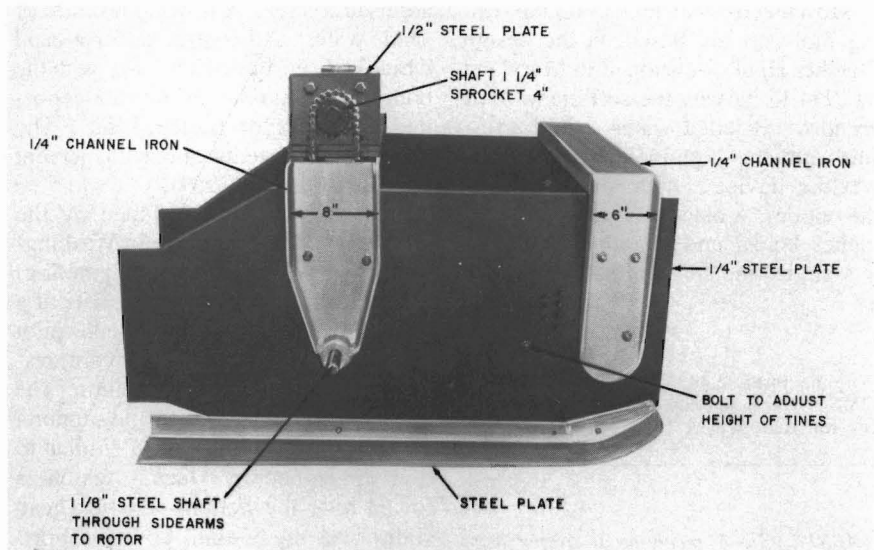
Side view of escalator during construction showing method of attachment of hydraulic drive motor and details of frame construction.
